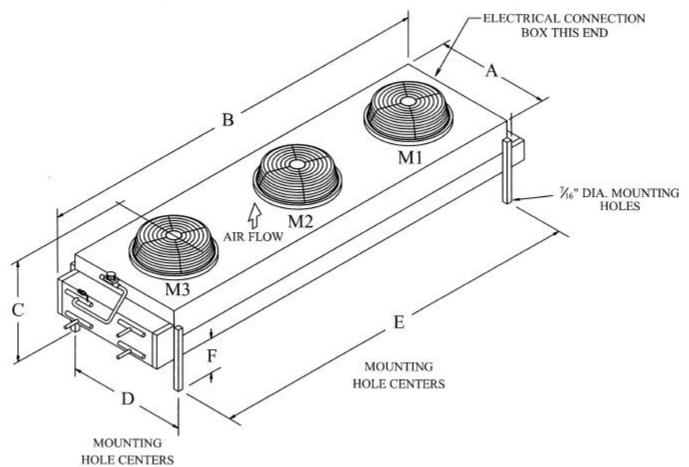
Condenser Dimensions (Condenser pictured: DD-231)
